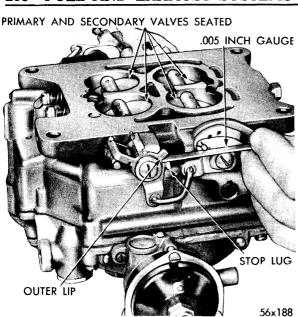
Checking Opening of Secondary Throttle Valves (Step 3)
